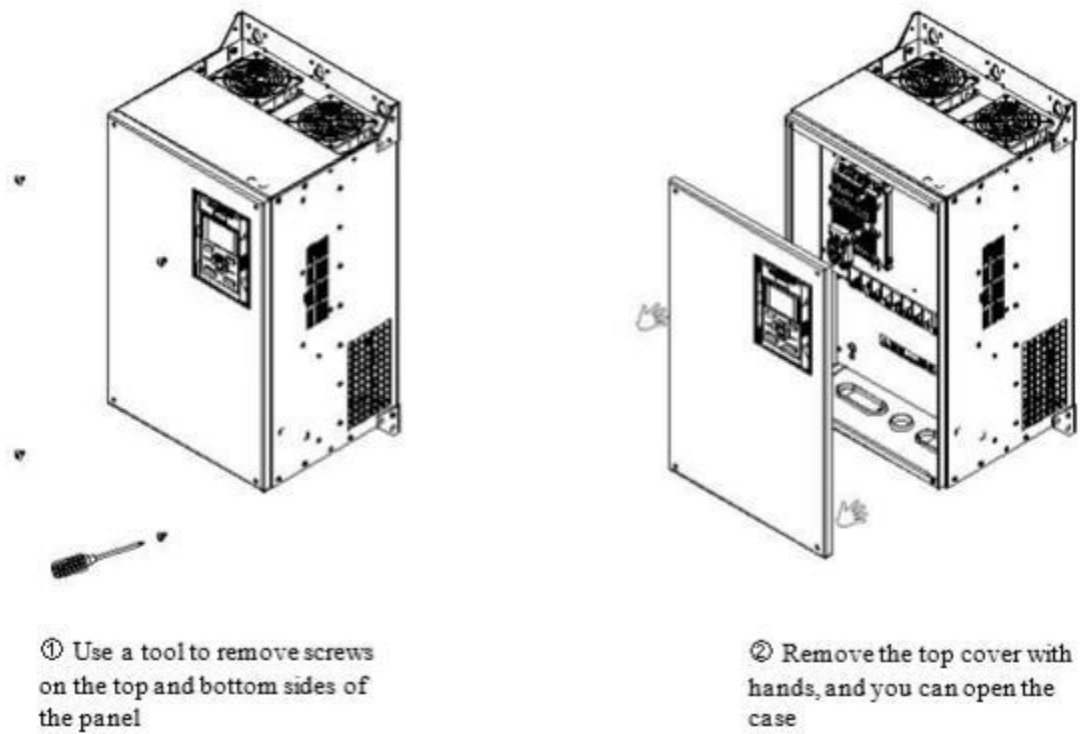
Illustration of 660V 018G/022P~055G/075P panel removal
